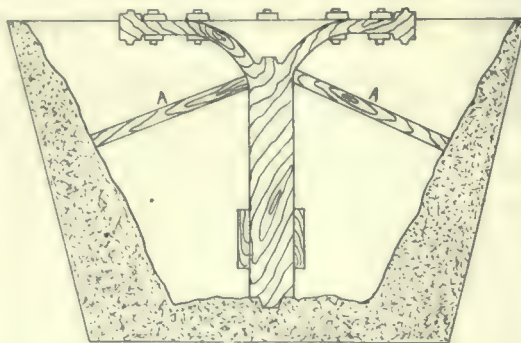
ILLUSTRATING FORMER METHOD OF MOULDING PATTERN.
